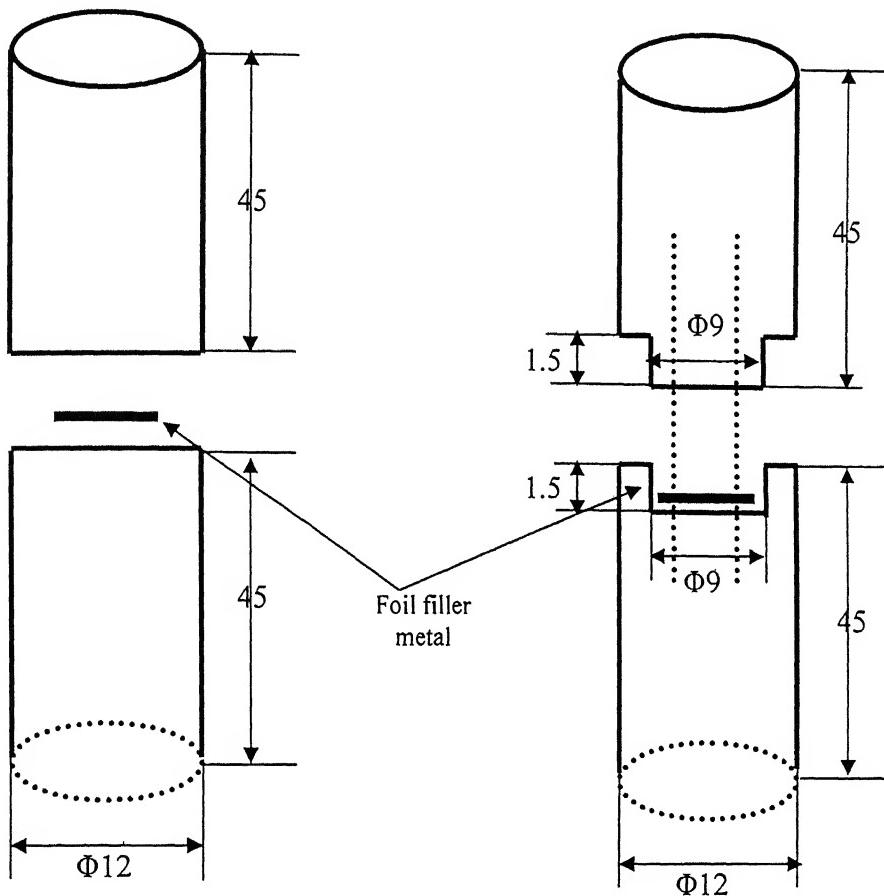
& 3.6.2: The design of tensile samples TT1B 850 and TT1S 840 with foil as filler metal. Note that no design tolerances were applied.
